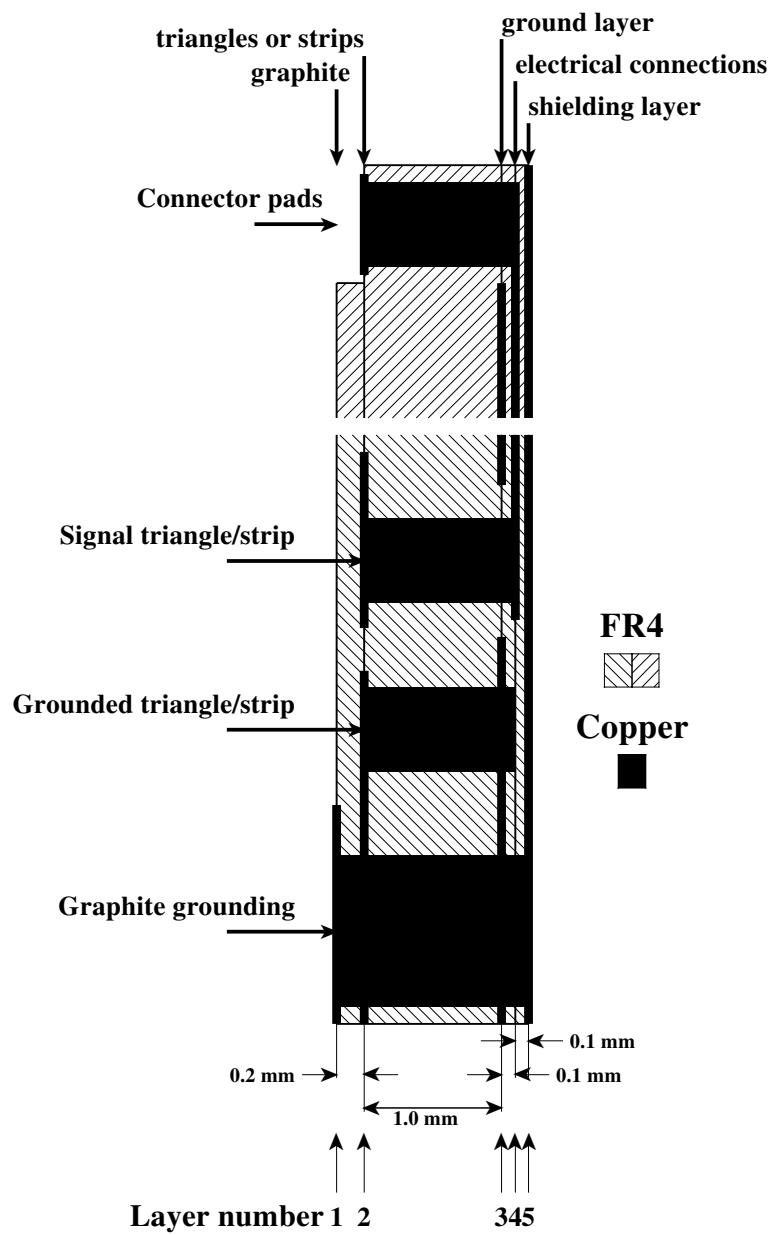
Section of the PCB structure. The thickness of the PCB layers doesn't take into account the thickness of the copper layer.
